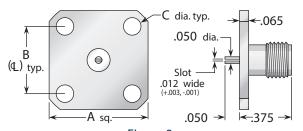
(11/16" square flange, interchangeable with BNC and TNC standard flange size)
